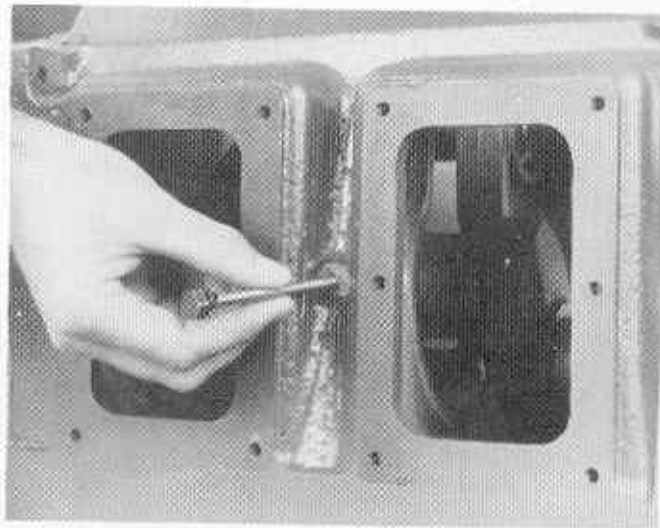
Removing the Intermediate Bearing Housing Locking Screw (PJ2)
